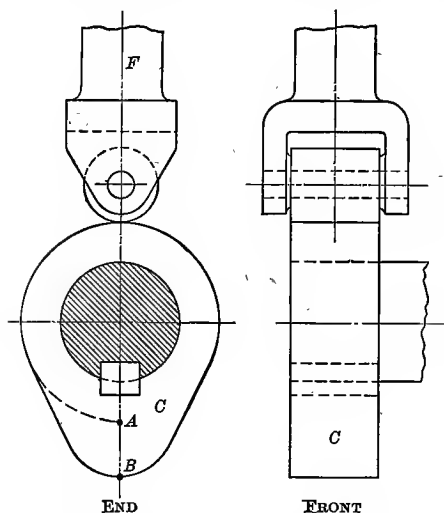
RADIAL CAM AND FOLLOWER,
